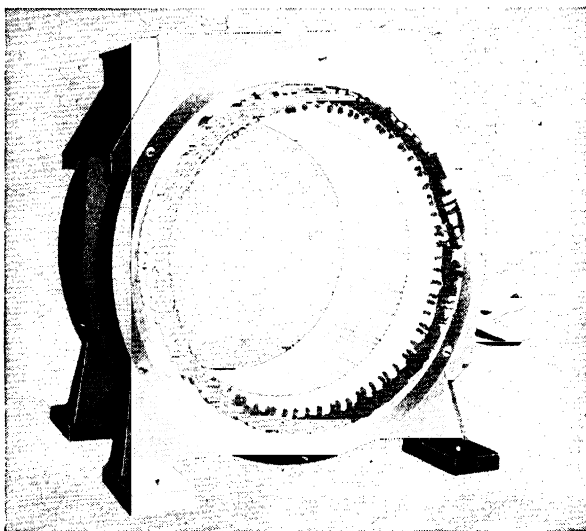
Wound stator for 125-hp 340-rpm blower, and filter motor. (*Reliance Electric and Engineering Co.*)
